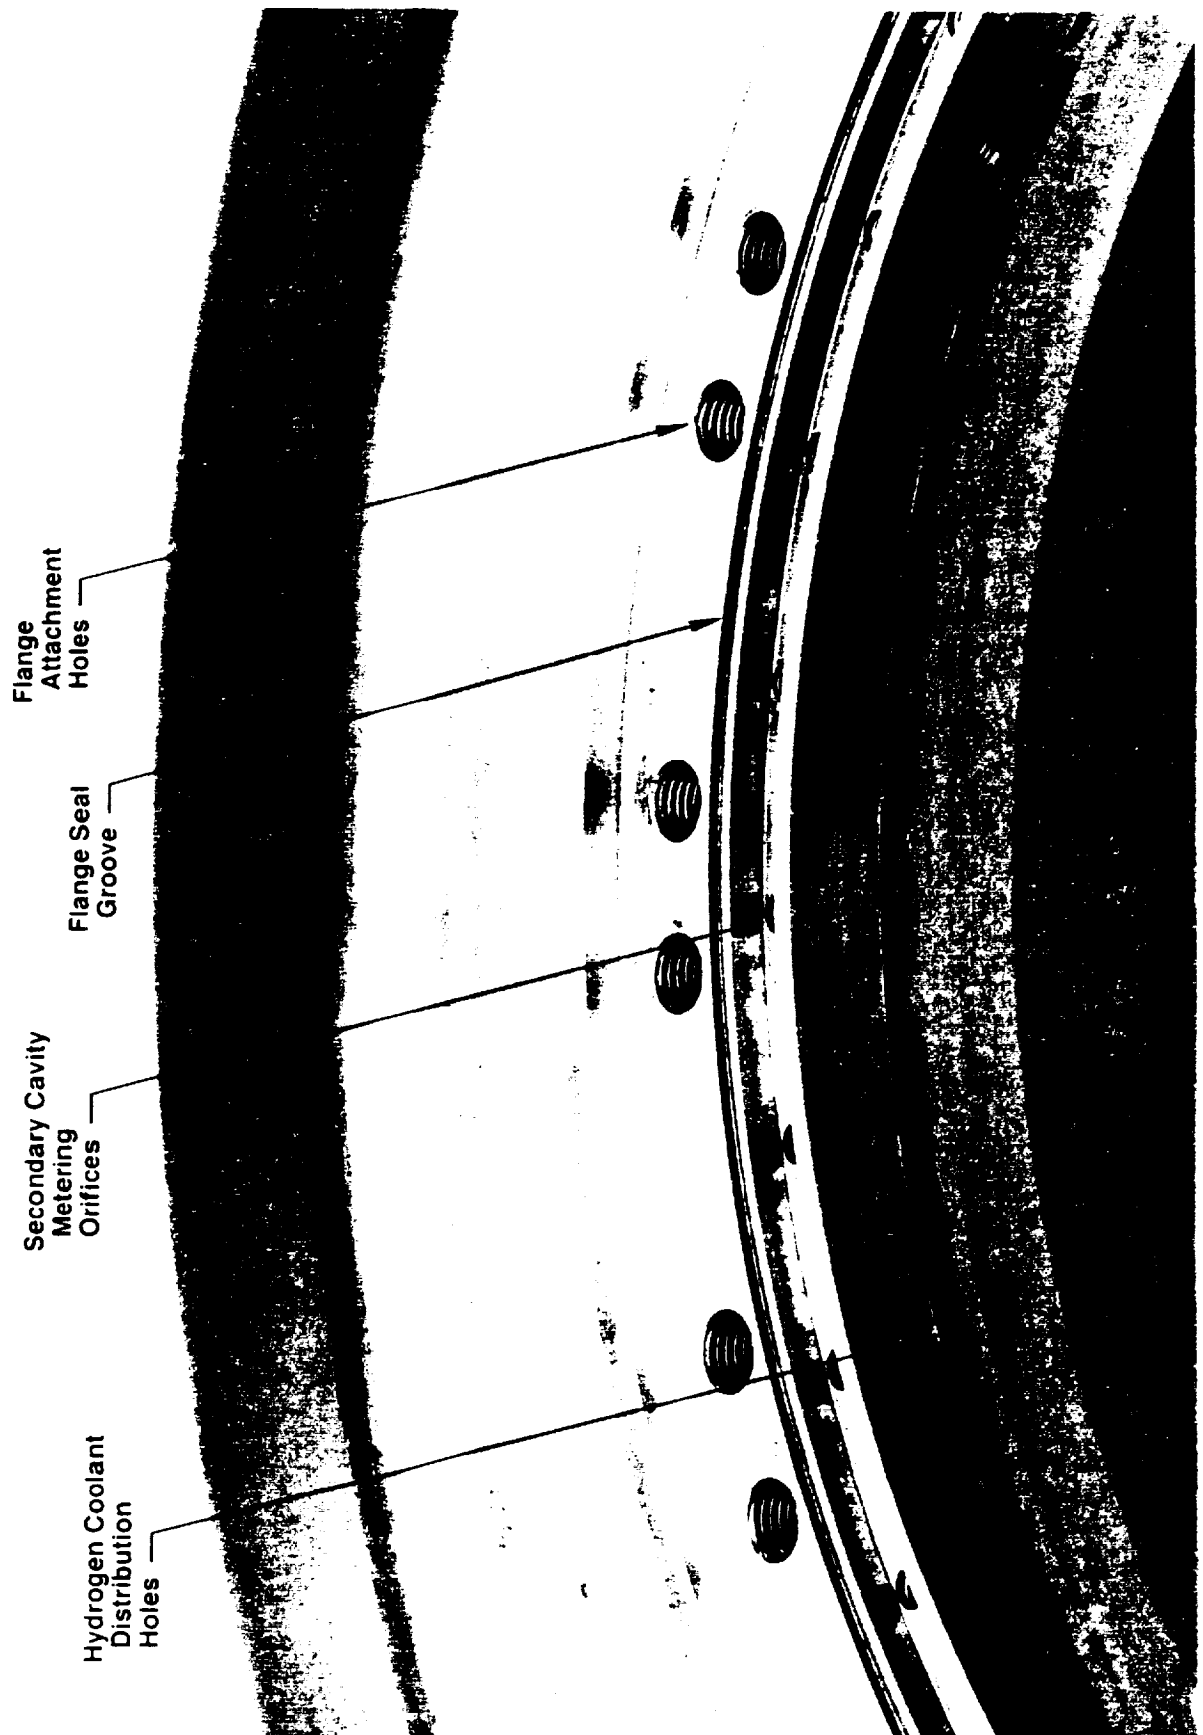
Calorimeter Nozzle Forward Flange
